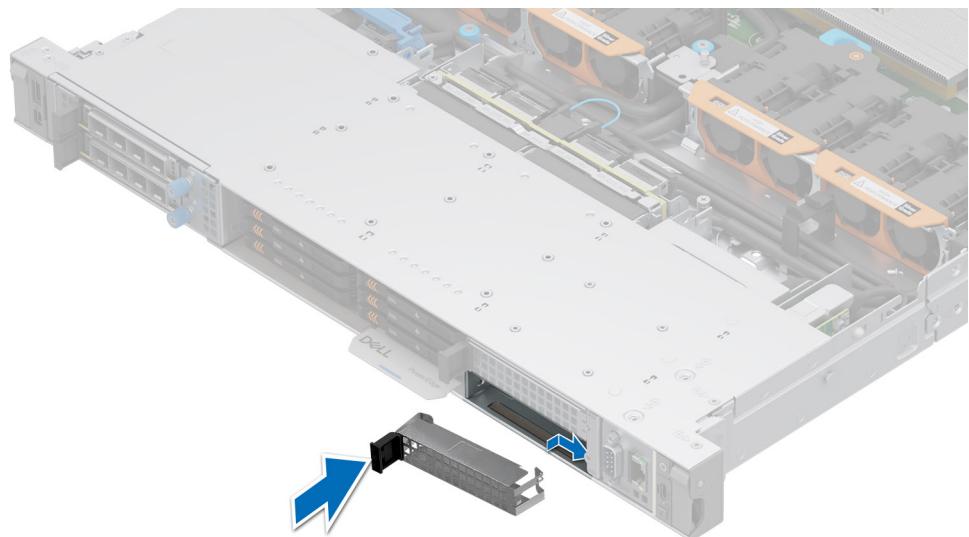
Installing an BOSS-N1 DC-MHS module filler bracket
